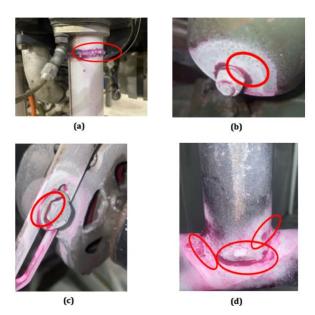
(a) Modified Exhaust Engine; (b) Coated Bolt and Nut; (c) Uncoated Bolt And Nut; (d) Towing Bar
